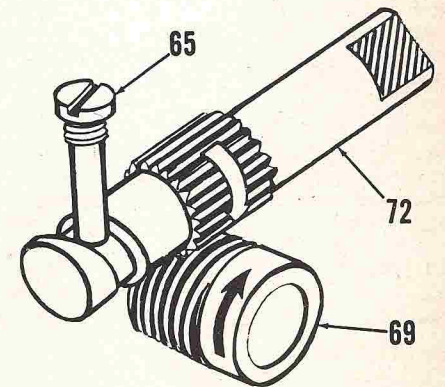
B — Schematic view showing automatic oil pump operation, Worm gear (69) driven by crankshaft turns plunger and gear (72) at 1/20 engine speed. As plunger turns, cam on end of plunger which engages cam screw (65) causes the plunger to go back and forth. Flat on other end of plunger acts as inlet and outlet valve as it uncovers intake on suction stroke and outlet on pressure stroke.
